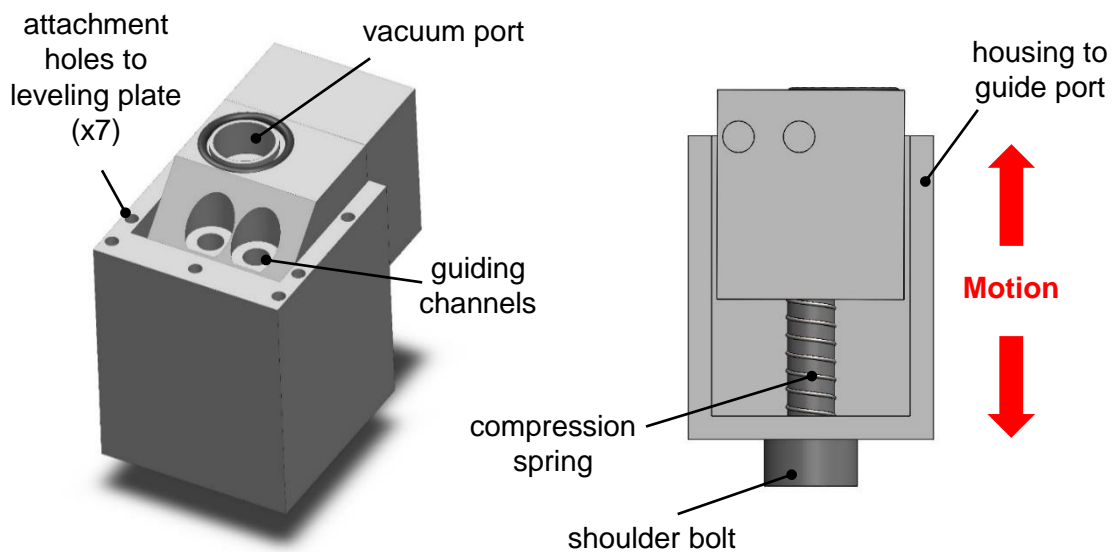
Schematic of PBP vacuum system, bottom view of PBP
